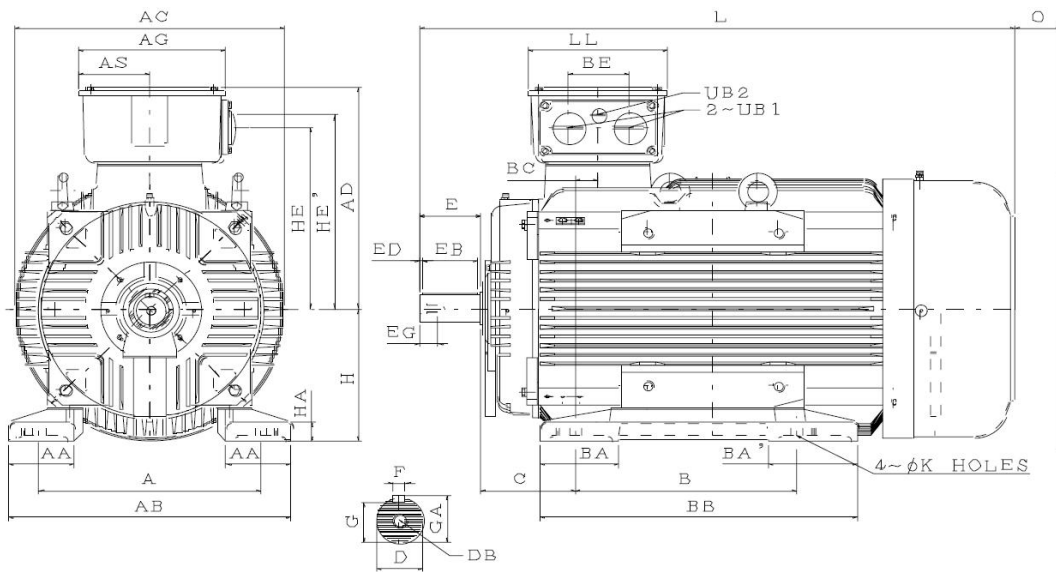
Outline drawing of cast iron design, feet version, mounting B3; frame size 315D
